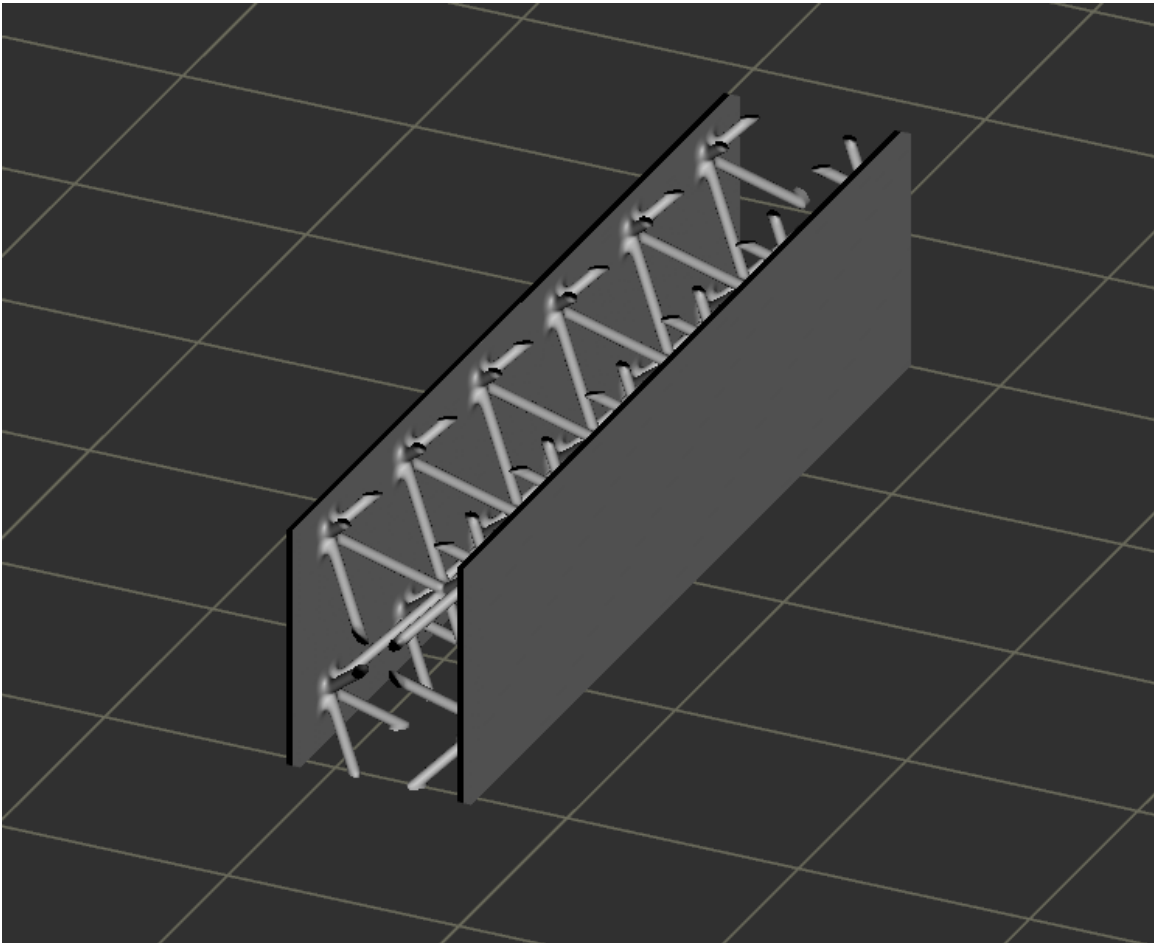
Example of unconnected lattice struts in a sandwich beam
